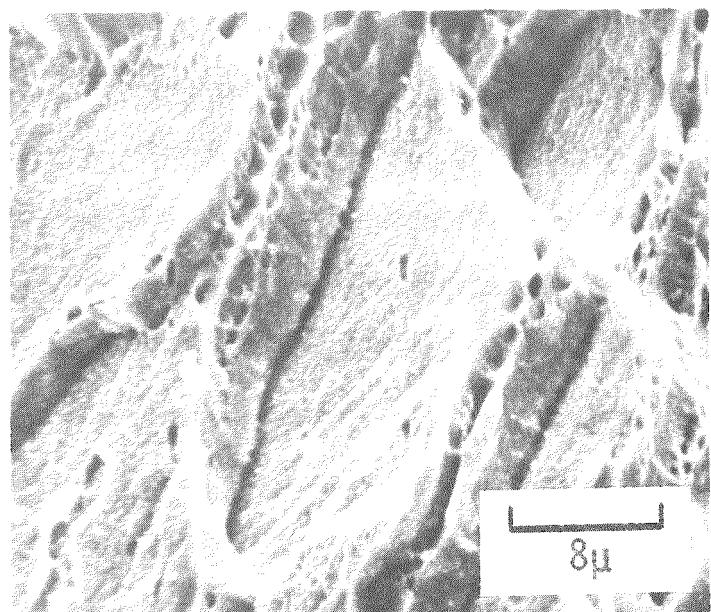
Electron fractographs revealing the fracture surface appearance at 800°F.
